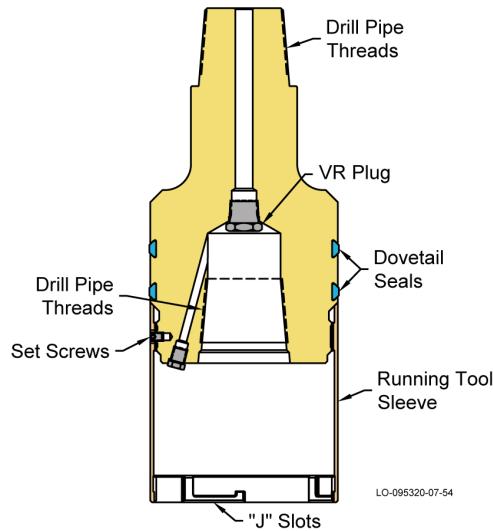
Combination Tool (Seal Assembly Running Tool Configuration)
